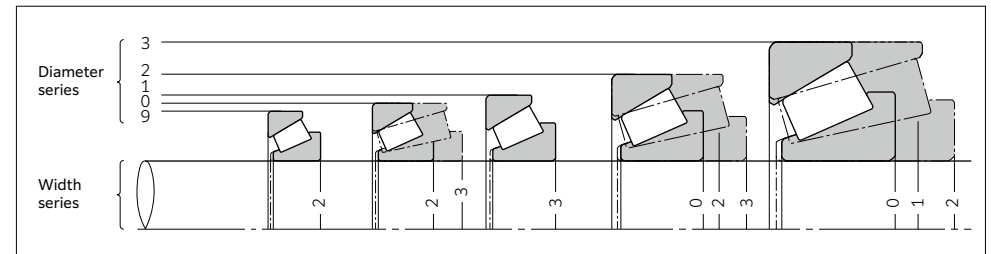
Dimension series for tapered roller bearings (based on JIS B 1534)
